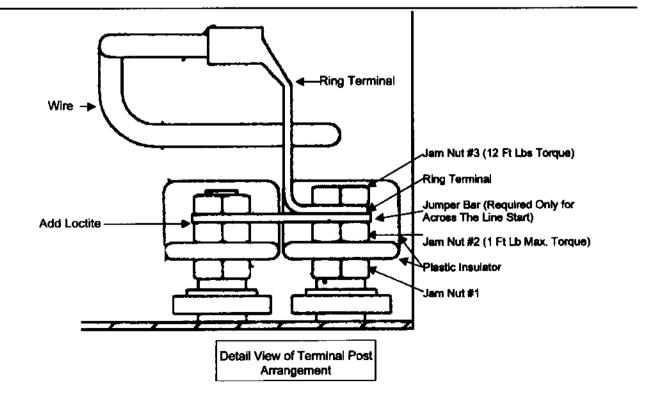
06E, 06CC & 06T TERMINAL WIRING
